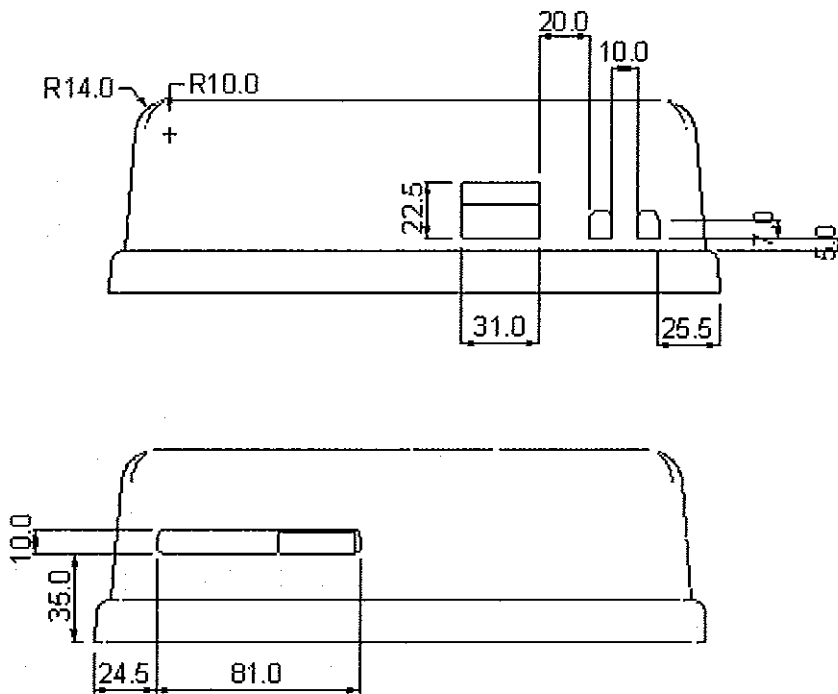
Top view of the Vacuum Formed housing showing dimensions in mm.
